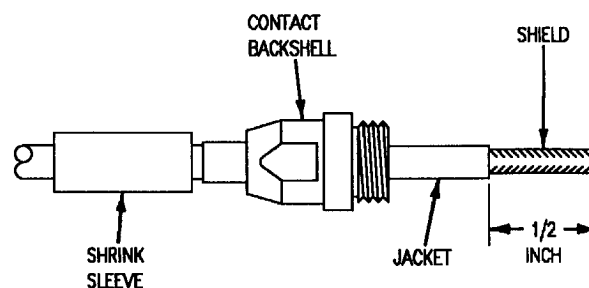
885-270-001 Coaxial Assembly Procedure (Sheet 4)
